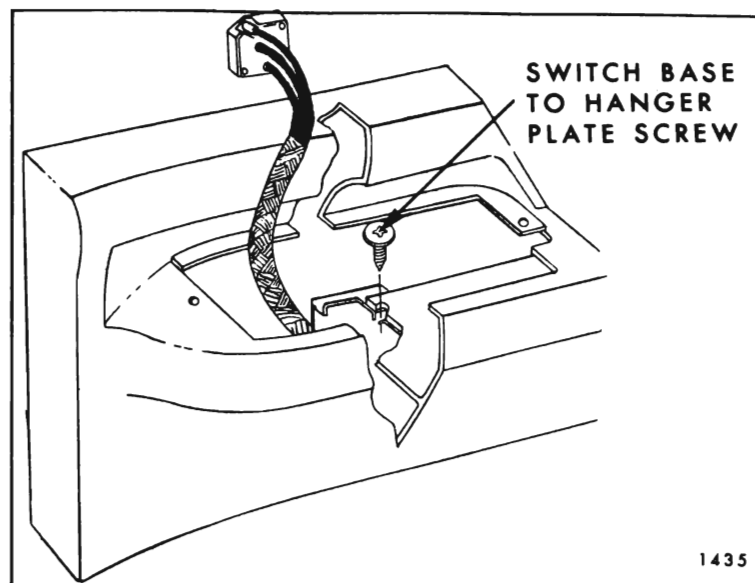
Door Trim Pad Removal - 68200 Series
